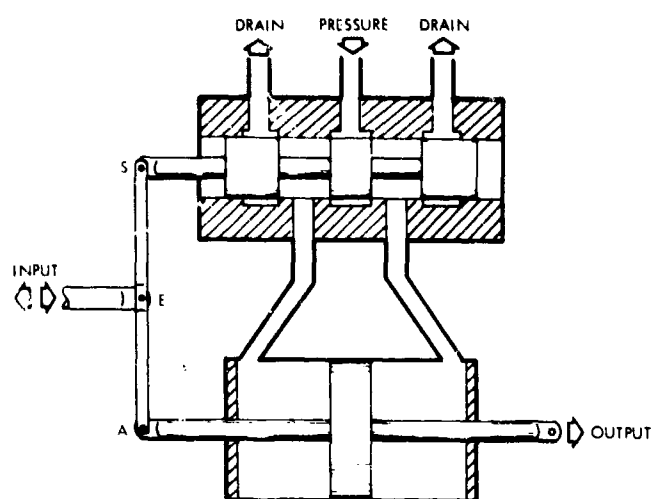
Single-Stage Servo Valve with a Mechanical Input
